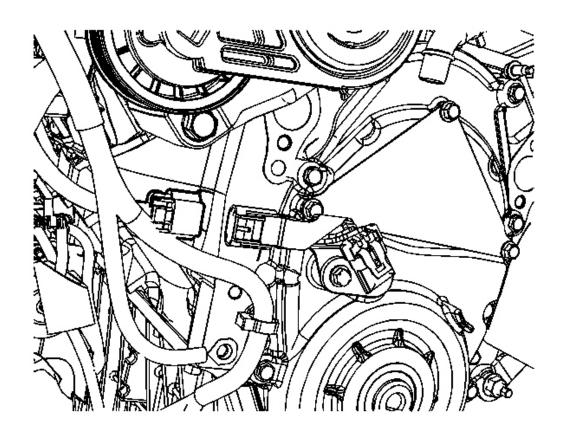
Camshaft Position (CMP) Sensor Wiring Harness Jumper Courtesy of GENERAL MOTORS CORP.
